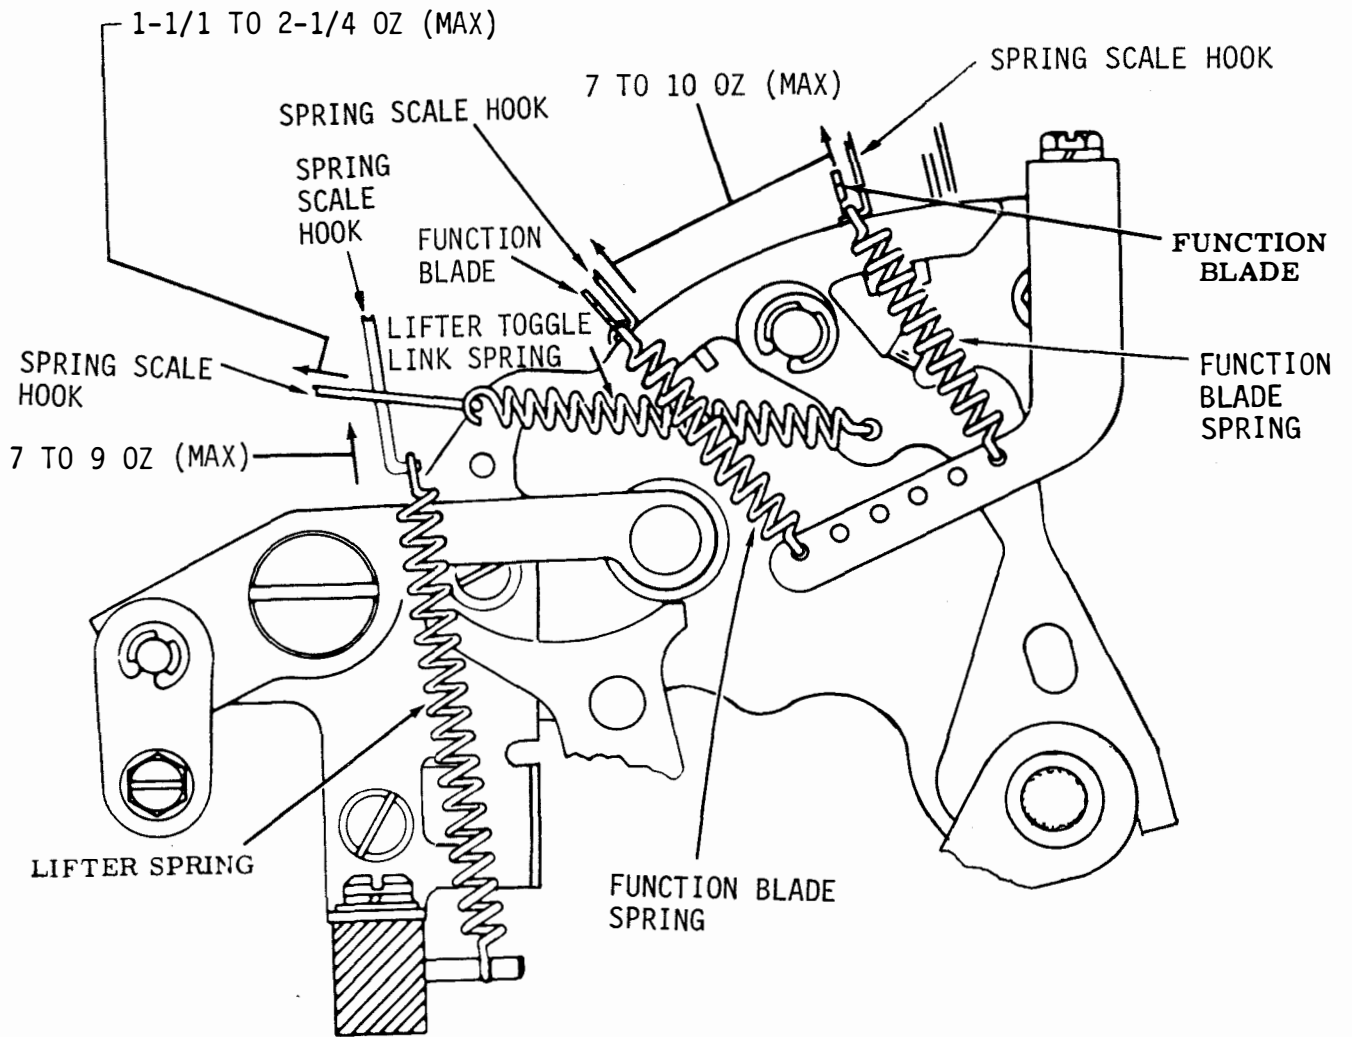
Function blade Springs, Lifter Spring and Lifter Toggle Link Spring, Rear View
